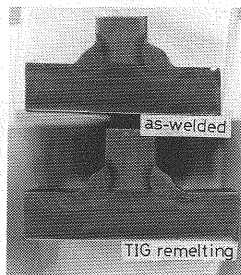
Macroscopic Photographs of the Fillet Weld Toes.
